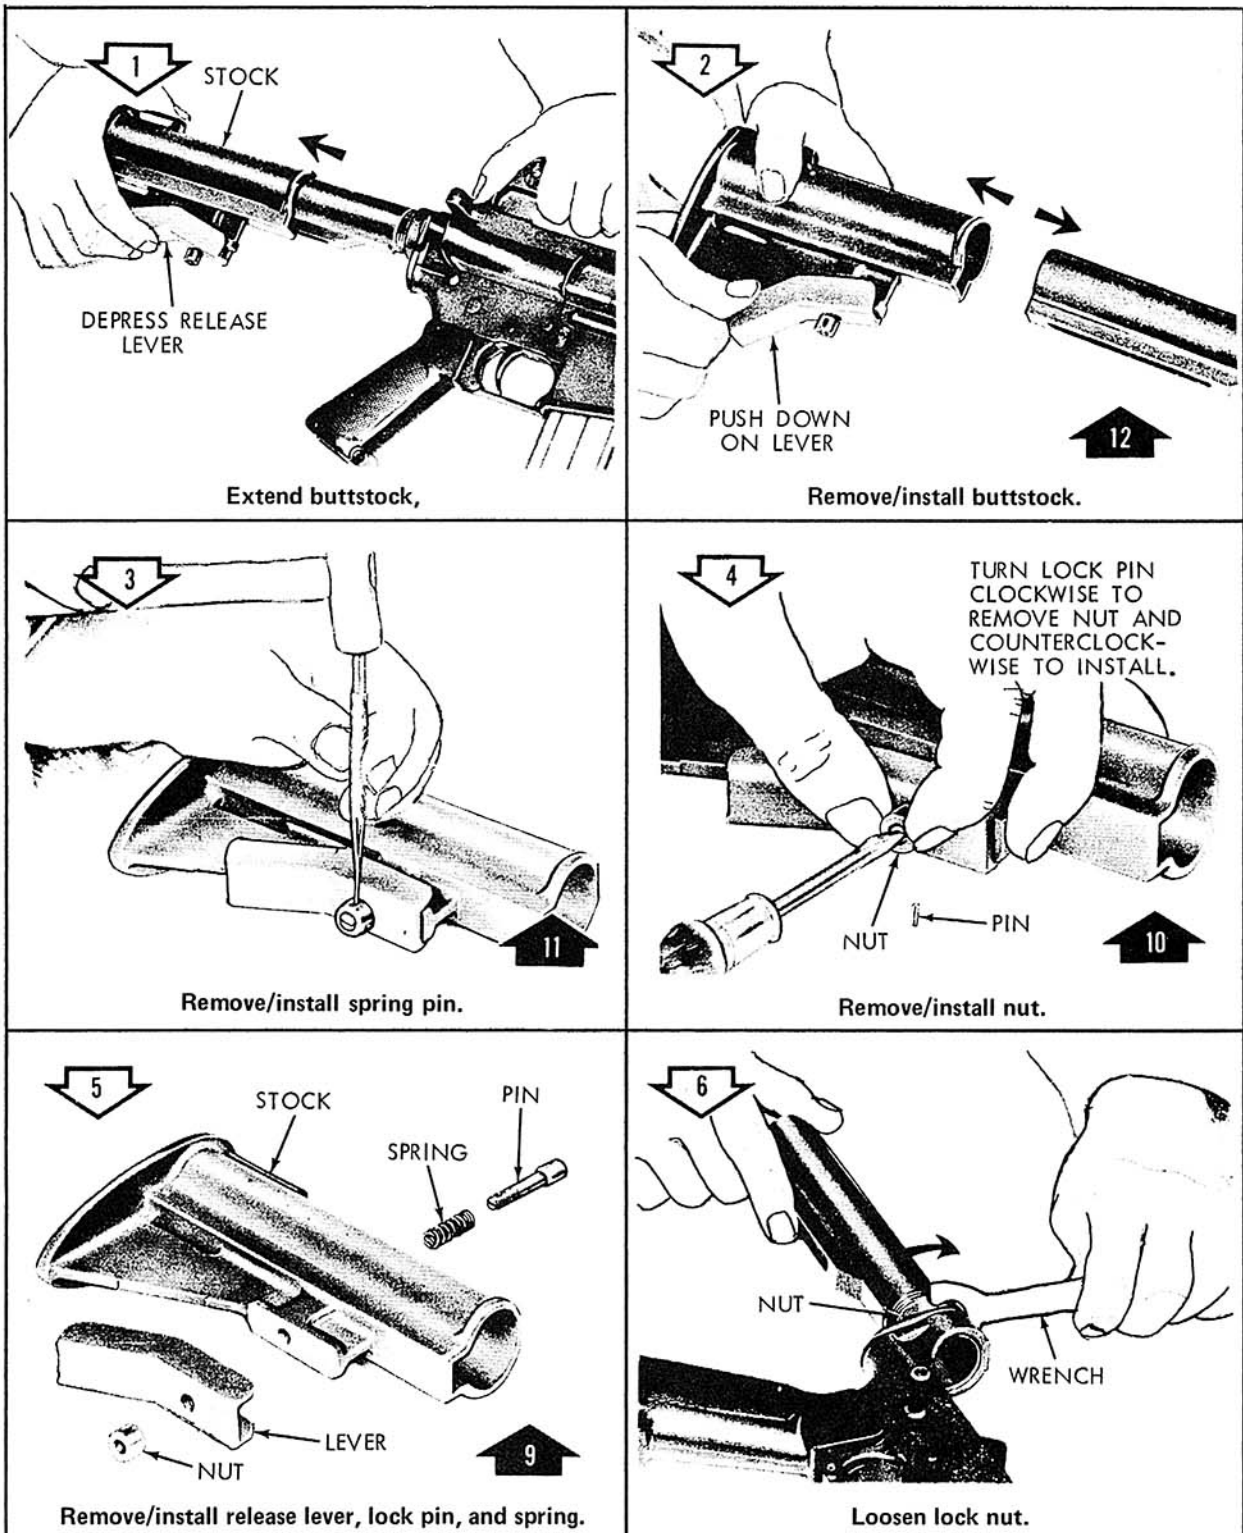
Disassembly/Assembly of the Commando Submachine Gun.
